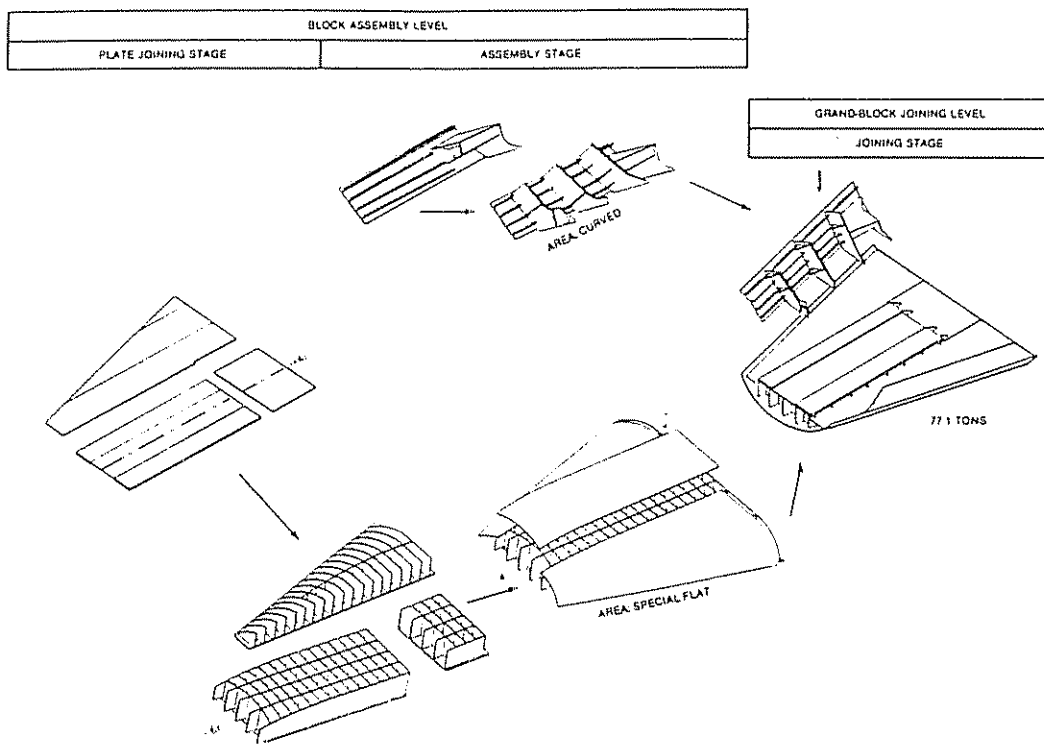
Block assembly and grand-block joining, showing the bottom of an engine room
